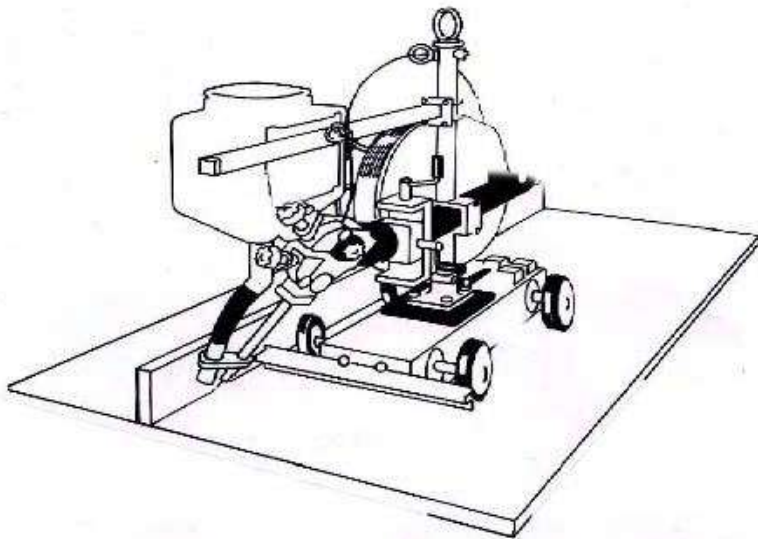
(b) Angle Welding Using The Angle Iron
